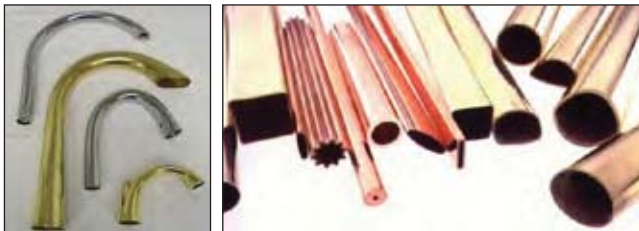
Complex shapes can be created by hydroforming. It is used to form component pieces for the automotive, plumbing, musical instrument and many other industries. Its advantages include: reduced weight, smaller production runs, lower component costs and tighter tolerances.
